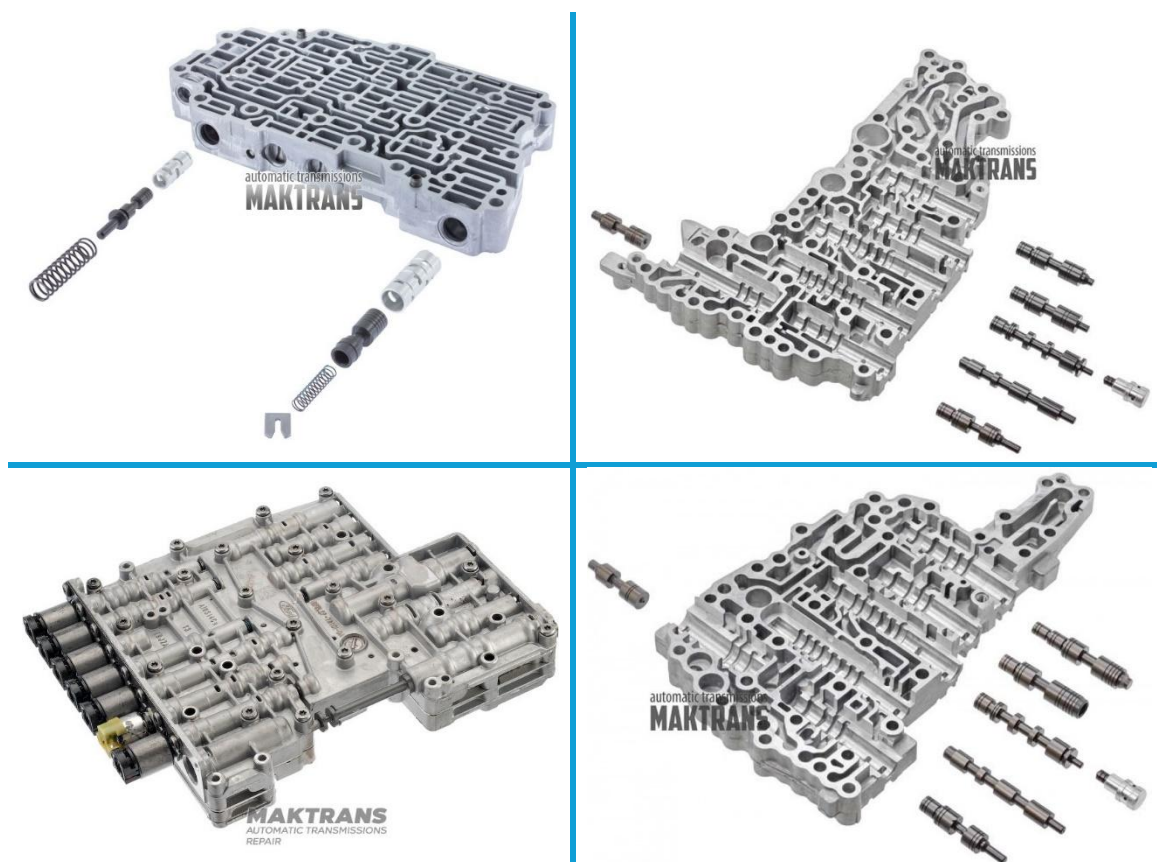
Real-life examples of mechatronic valve control systems [1, 2, 3, 4]
